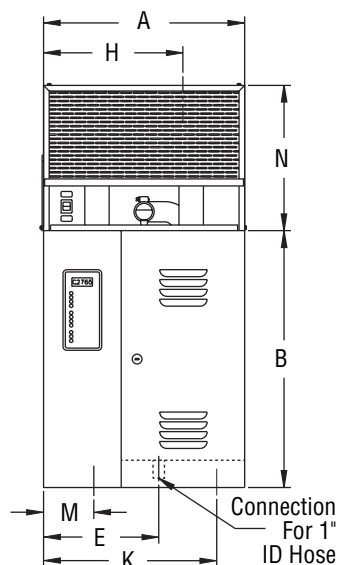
Model EHU-701 with EHF-2 Fan Package — Side View
